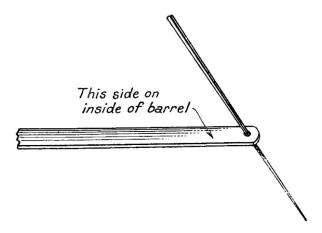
Broaching, Showing Angle of Hole in Mainspring
